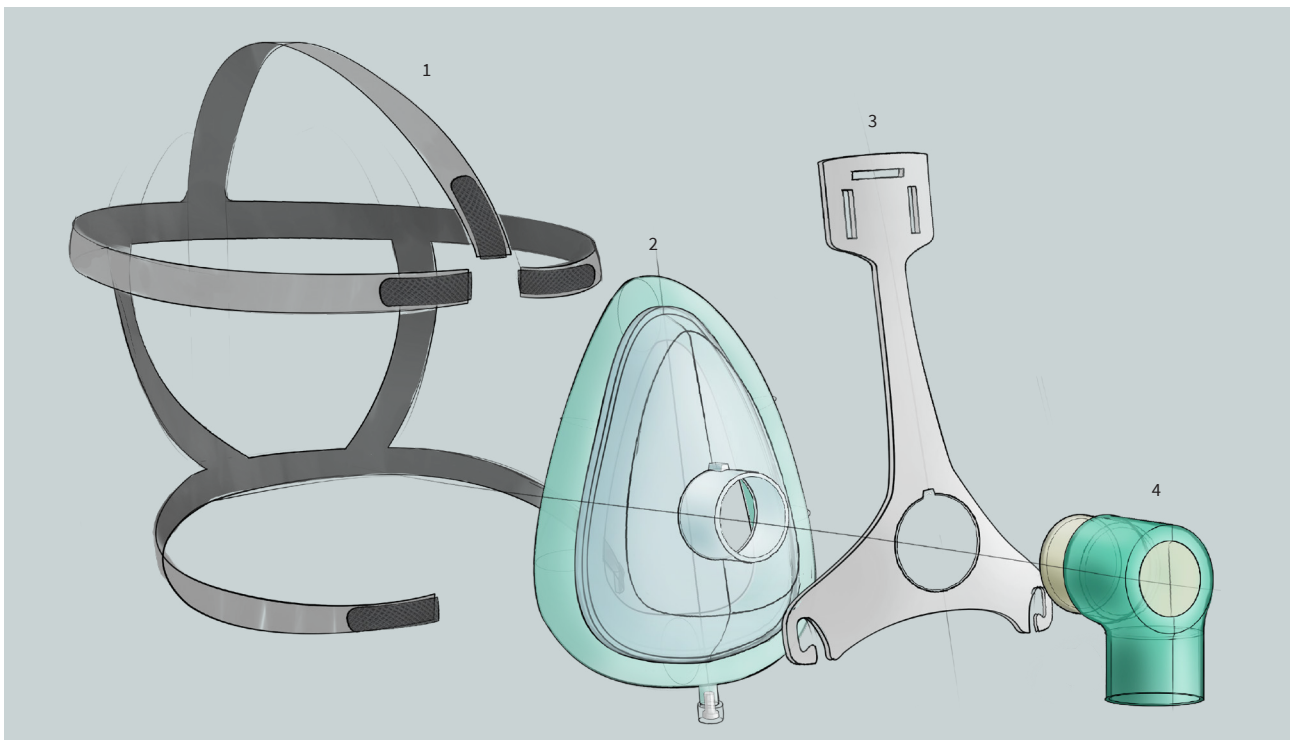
Parts of the Quick Curable Mask, (1) headgear, (2) anaesthesia mask, (3) holder, and (4) swivel.
